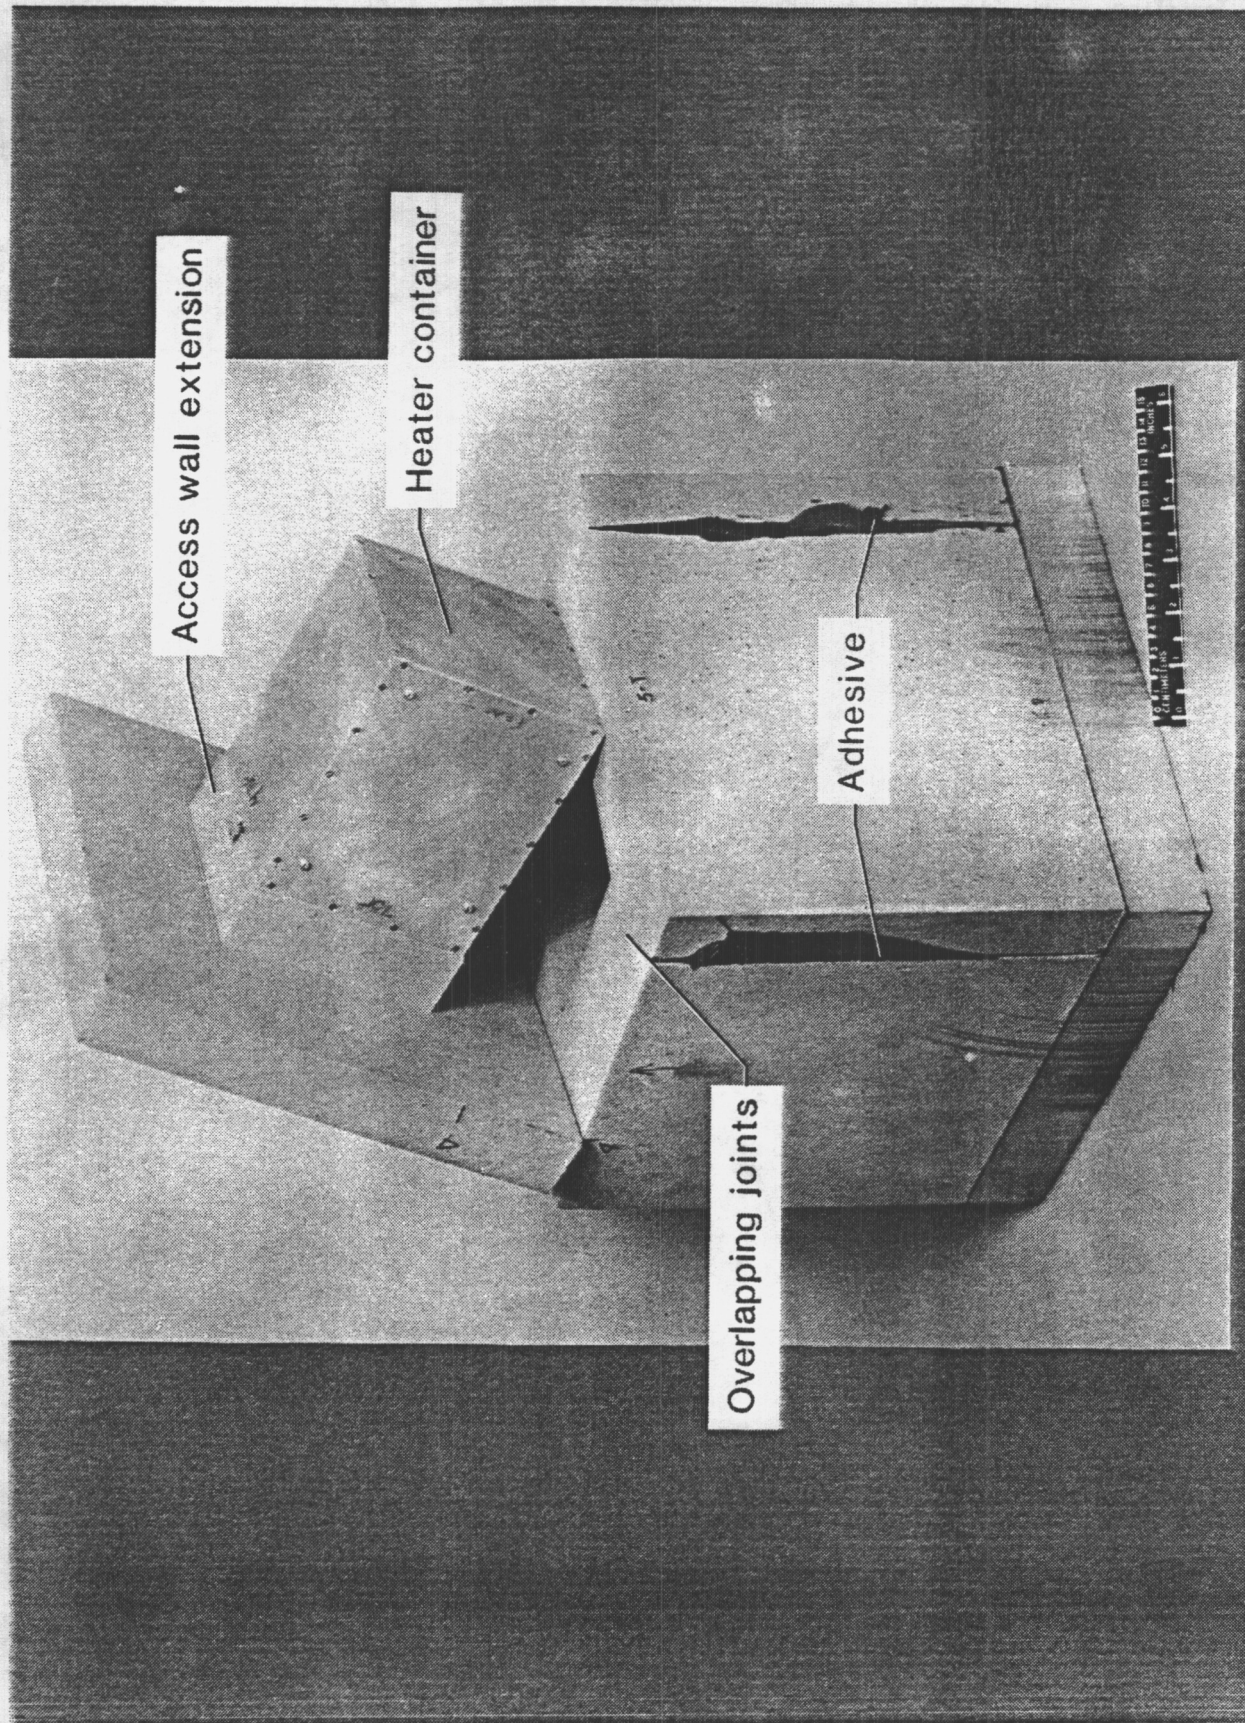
EXAMPLE OF PIECE WISE ASSEMBLY ENCLOSURE (TUNNEL WALL PACKAGE)
